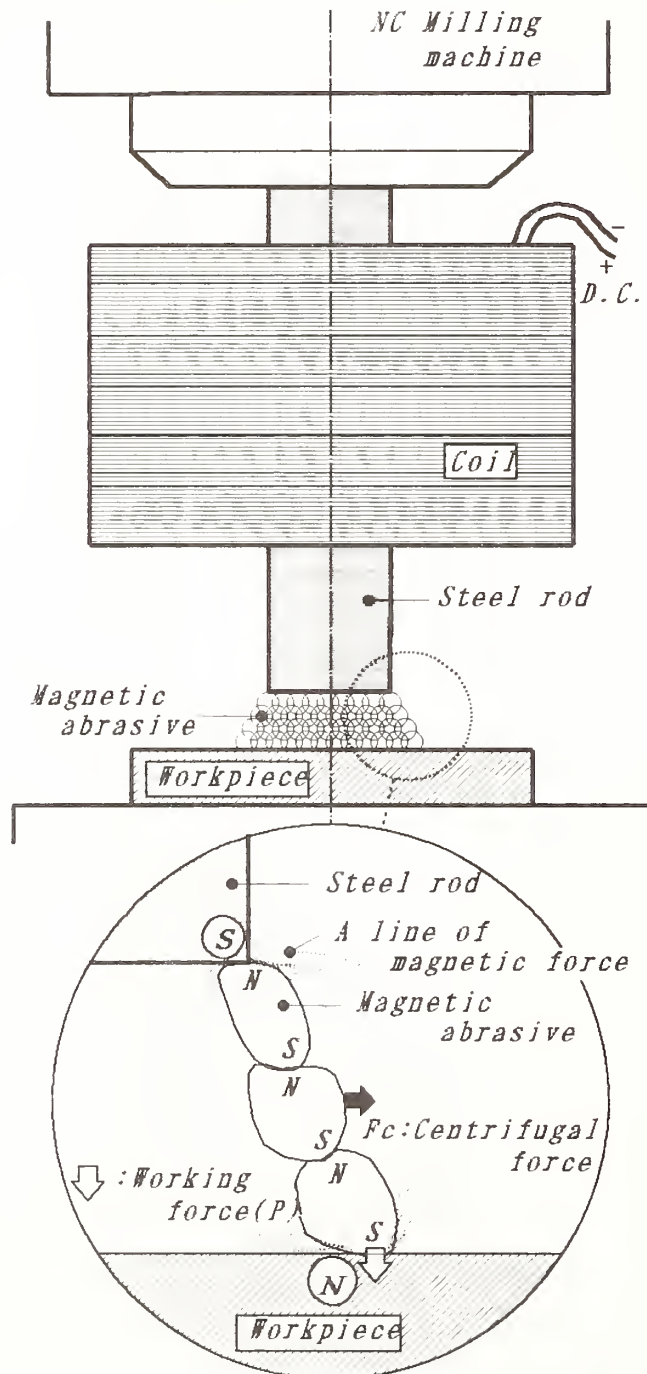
Outline of magnetic abrasive finishing machine and its finishing principle
